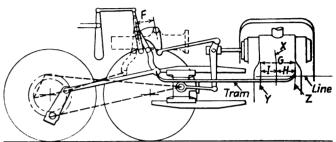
Baker valve gear showing dimensions used for determining correct eccentric-rod length
